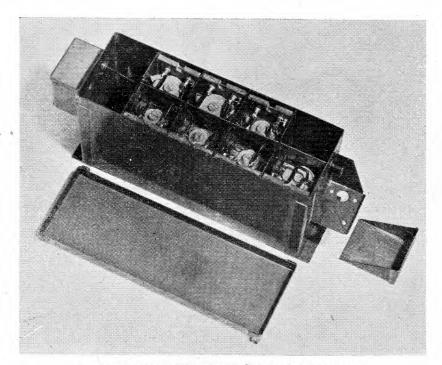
FILTER ASSEMBLY FOR SUBMARINE CABLE SYSTEM.
